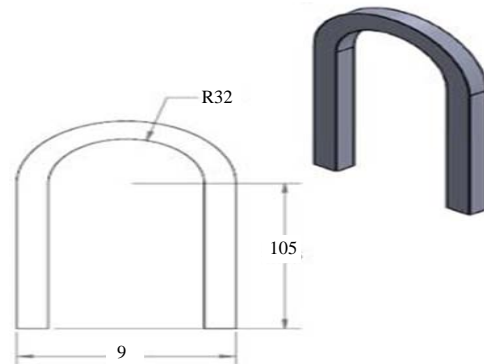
U-bend test specimen with dimensions (mm) (ASTM., 2000)
